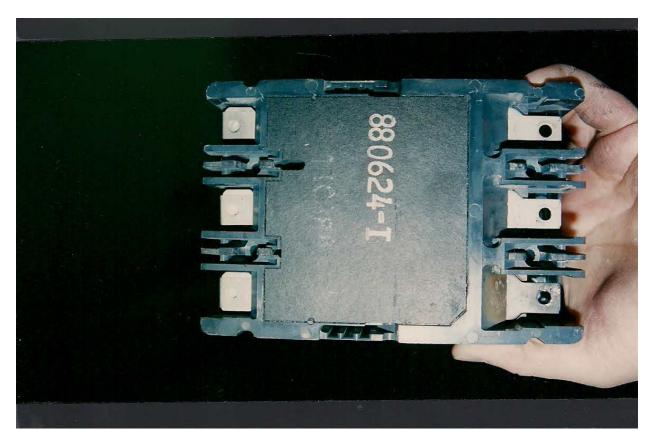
Defective circuit breaker with oxidized tab at bottom right.
